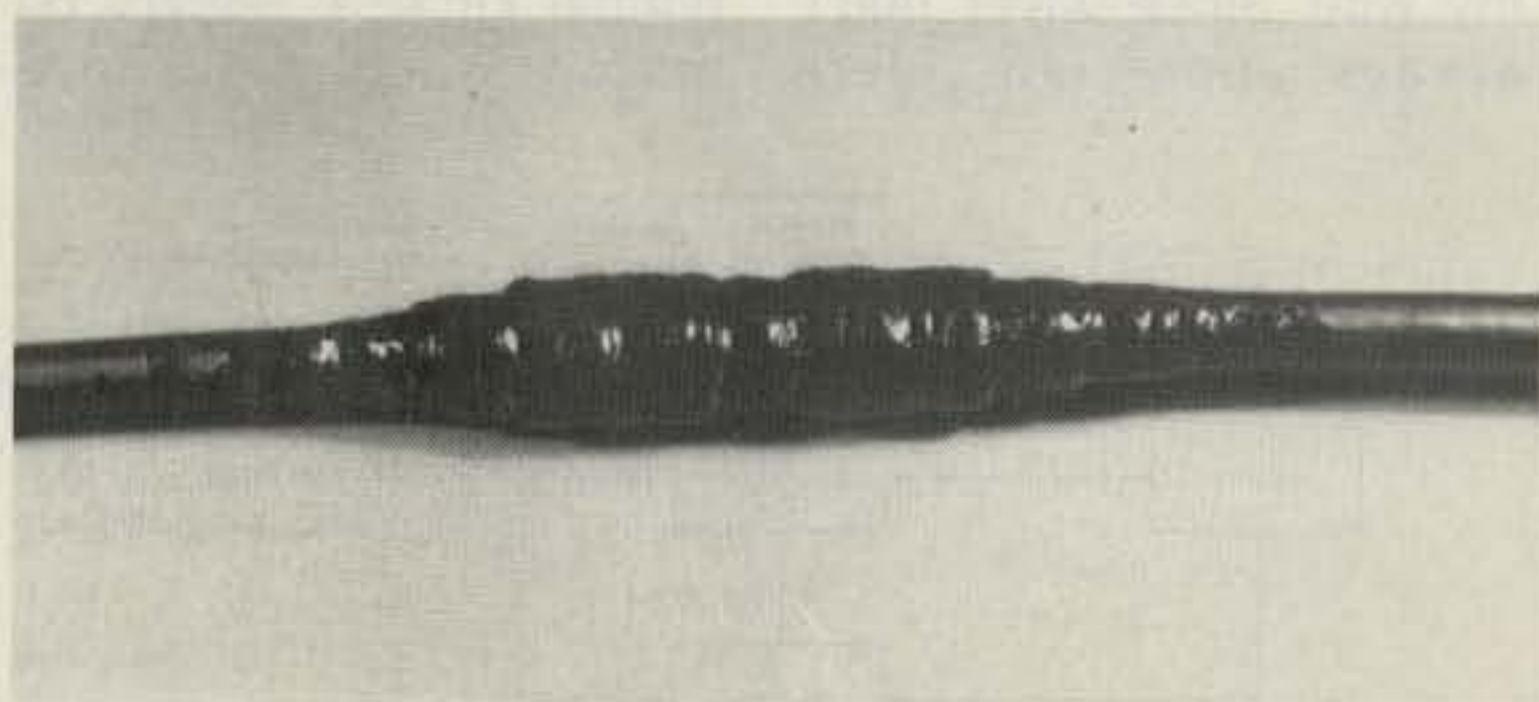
Photo F. Final covering of vinyl tape with outer coating of electrical sealer.
